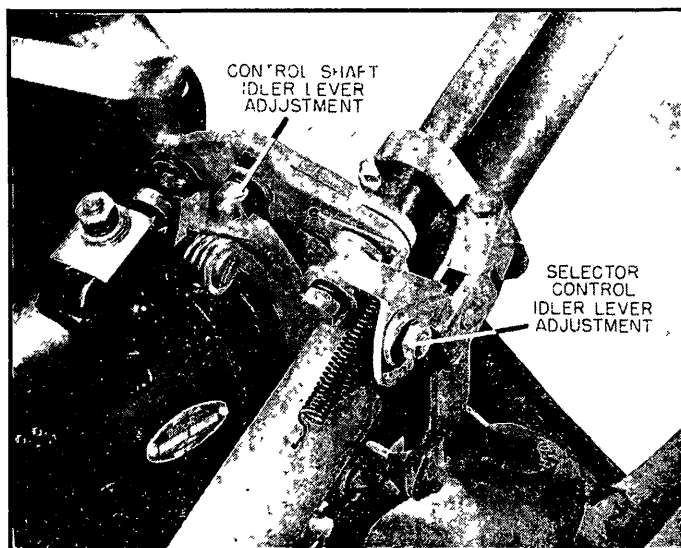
Gearshift lever adjustment. 1939-48 with synchromesh transmission
